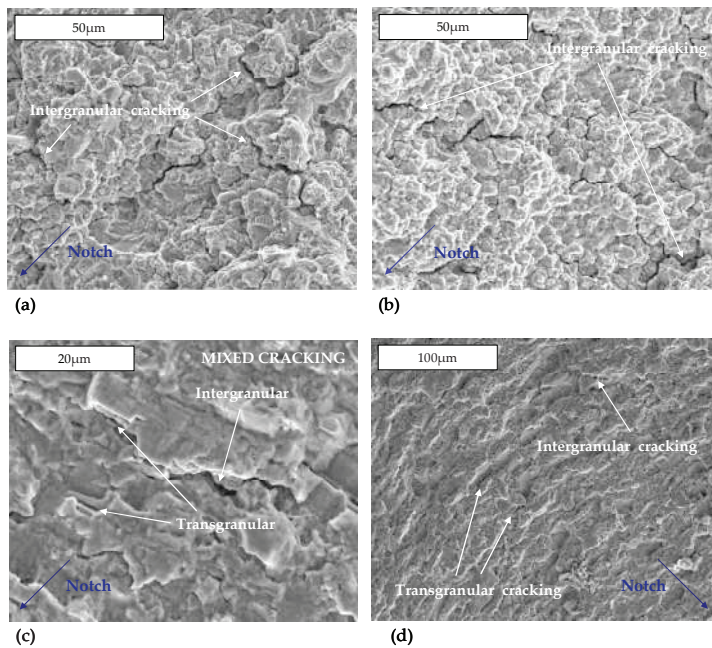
High magnification SEM images of the cracking on the fracture surfaces of RR1000 specimens with 0.25mm starter notches, tested under *TMF* conditions (a) *IP* 300-650°C, (b) *IP* 300-750°C, (c) *OP* 300-650°C, and (d) *OP* 300-750°C.
